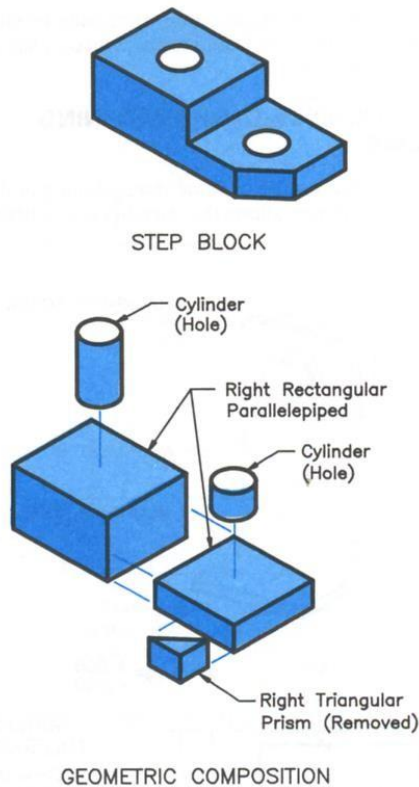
Mentally breaking a part into the geometric shapes that form the part is one method for determining the dimensions needed on a drawing.
